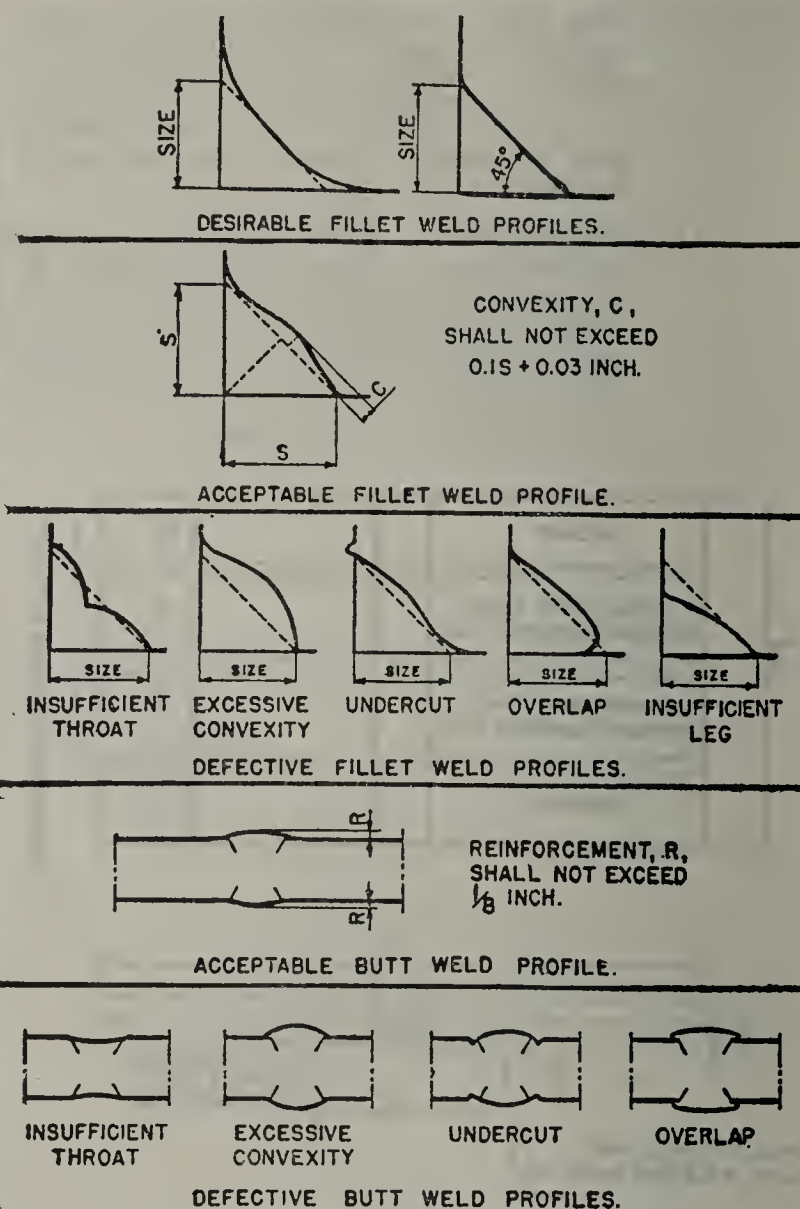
Acceptable and Defective Weld Profiles
